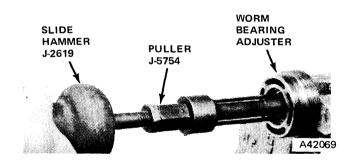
Removing Wormshaft Lower Bearing Cup
